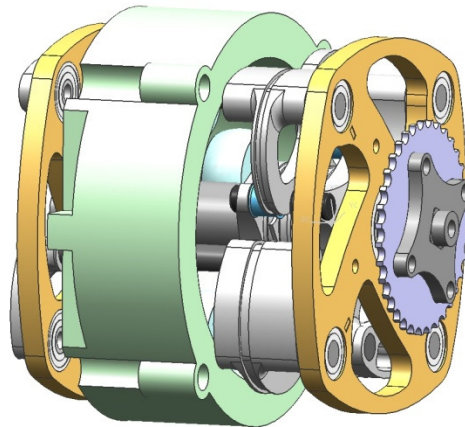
Gamma prototype with external cam and cable differential gear mechanism.
